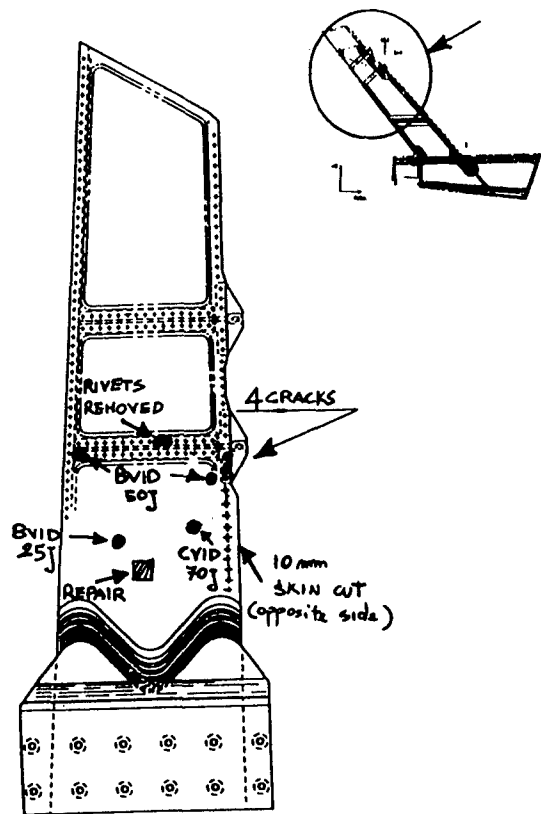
EH101 Tail Unit subcomponent for flaw tolerance test - Fin Area and 90° Gearbox Attachments
